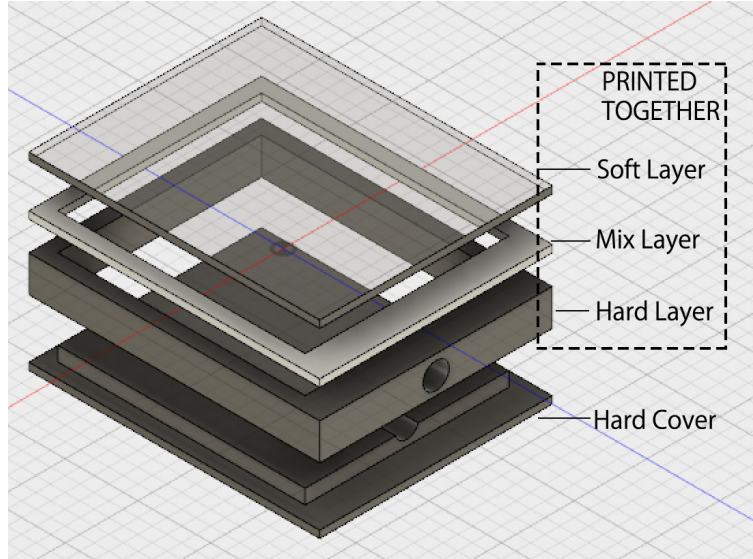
Exploded design view of the structure of the airbag's basic pattern.
